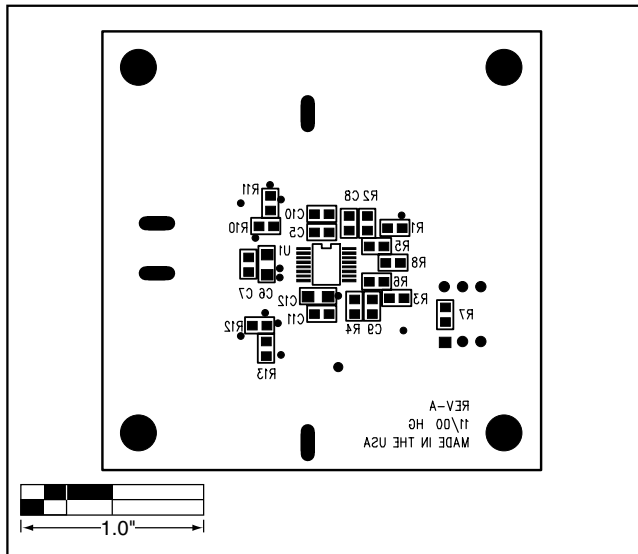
MAX1761 EV Kit Component Placement Guide—Solder Side
